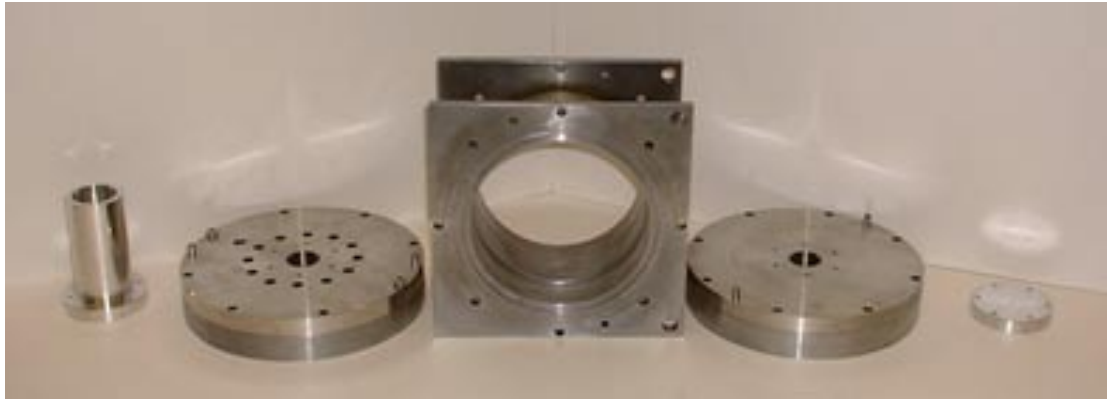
View of housing parts. From left to right: the thermocouple mount endcap, the endplate with feedthrough holes, main housing, endplate, and endcap.
